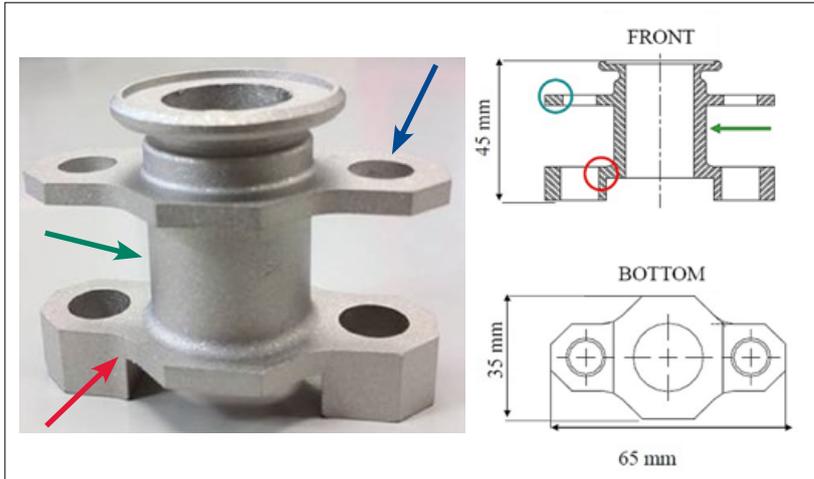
A titanium part used in fuel manifold of jet engines. The part is commercially fabricated by machining out of a forged blank
